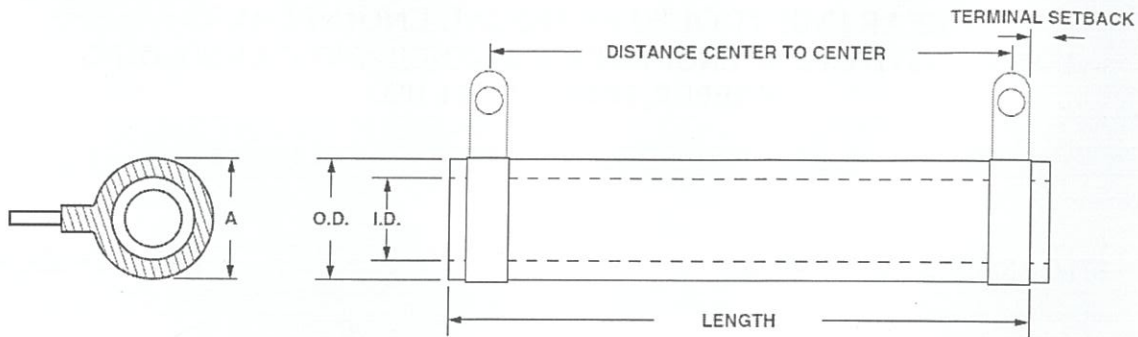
Front view and side view of required wire-wound resistor with dimensions
